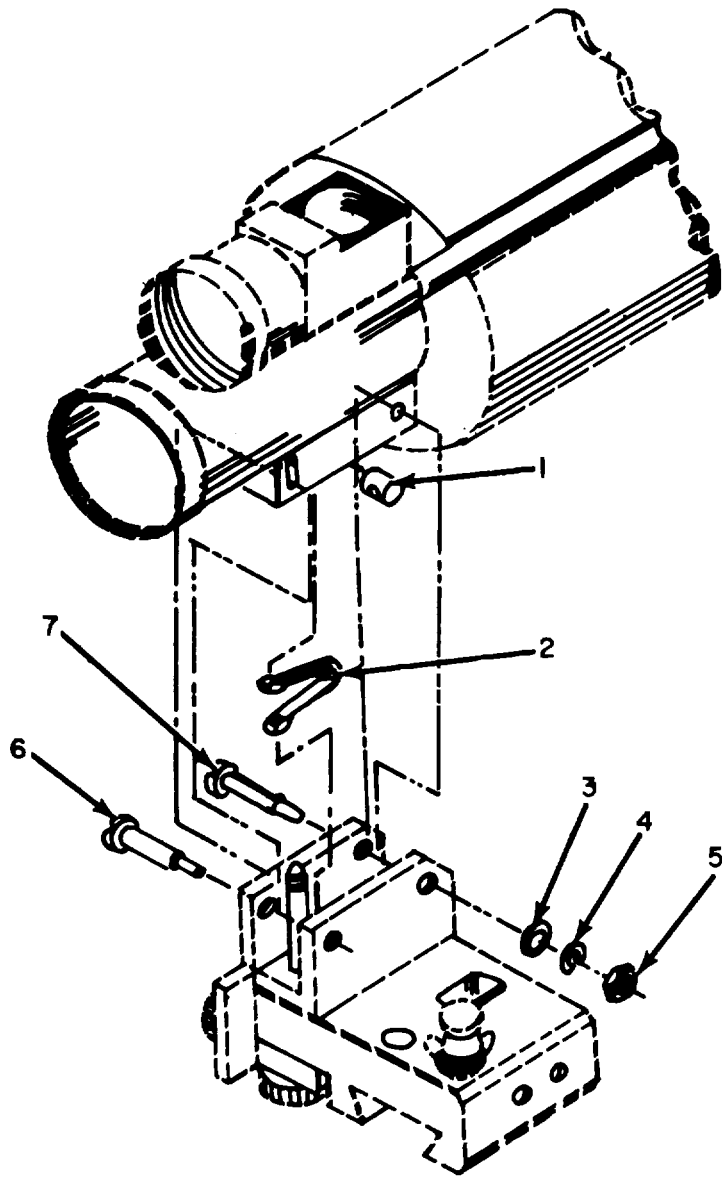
Boresight Assembly, Used on AN/TVS-2 (Sheet 1 of 2)
